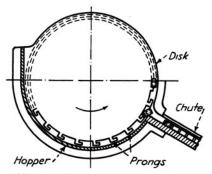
Another type of vertical rotating disk hopper for feeding hollow cylindrical pieces having a blind hole. Prongs are milled on the periphery of the disk; these prevent work from being fed open end up into the chute.
